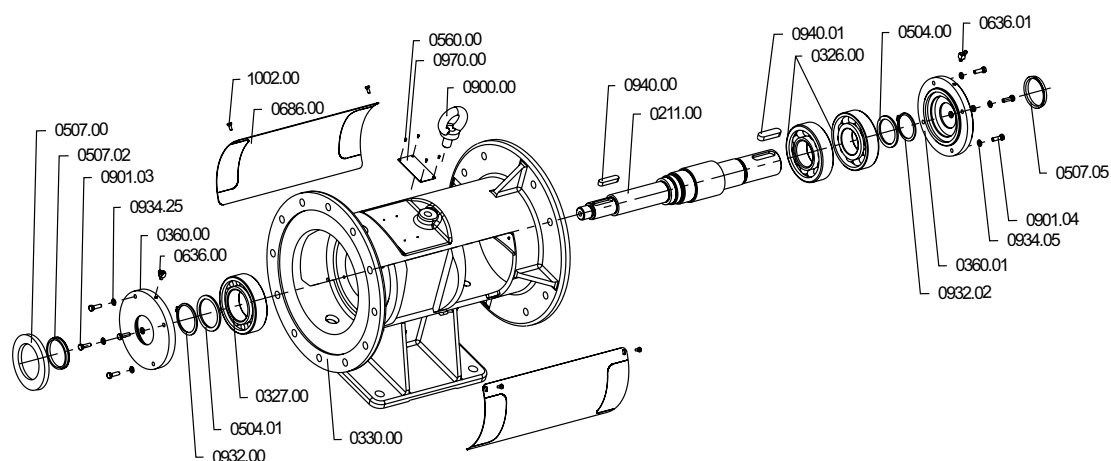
Parts overview bearing housing of motor frame size 180 and larger
